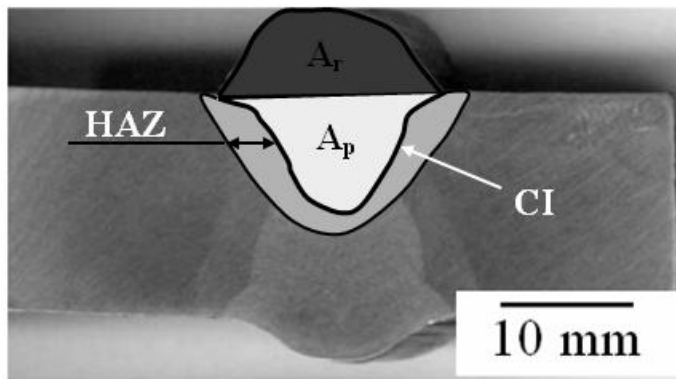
A photograph of a typical cross-section of the butt-welded joint showing the cooling interface (CI) and the heat affected zone (HAZ). A_p = weld penetration area and A_r = weld reinforcement area.
